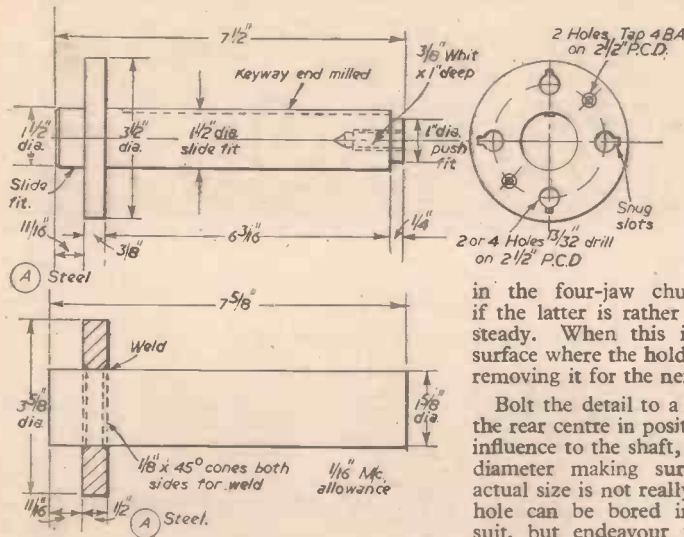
The vertical shaft. At the top is a machining drawing and below a welding drawing.
